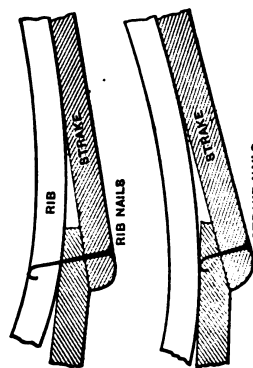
Two Examples of Lapstrake Construction.—Scale, 6 Inches to the Foot.
